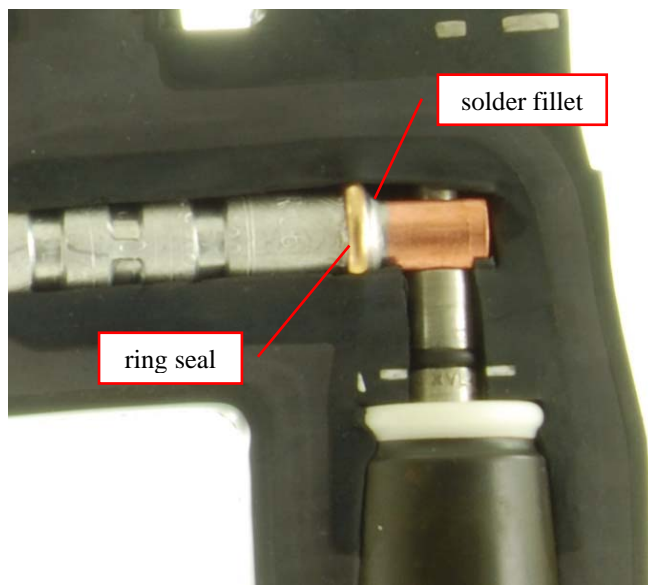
The improved sealing system eliminates the need for a manufacturing seal test, because there is no flashing to interfere with the seal. 100% field testing is performed.
